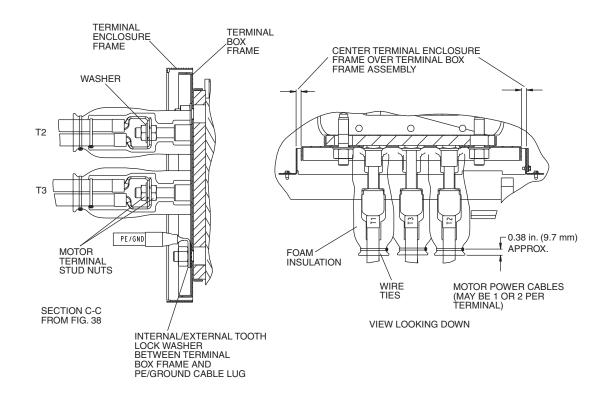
Motor Terminal Insulation (Q and R Compressors)
